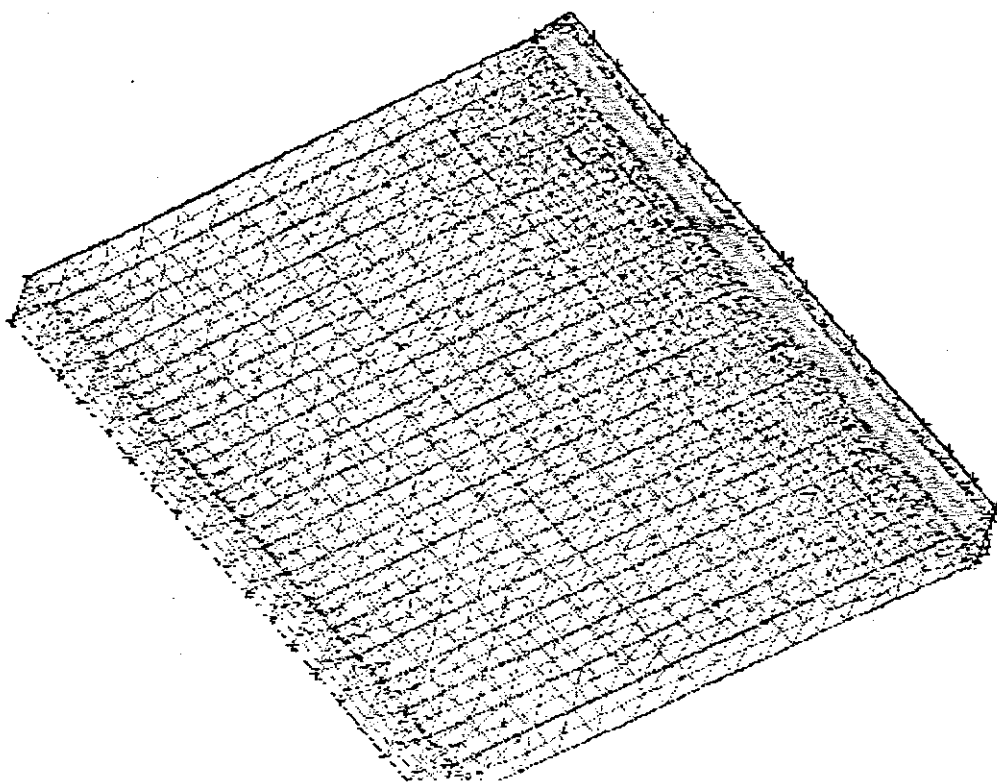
Depicting half the discretised butt-weld plate
